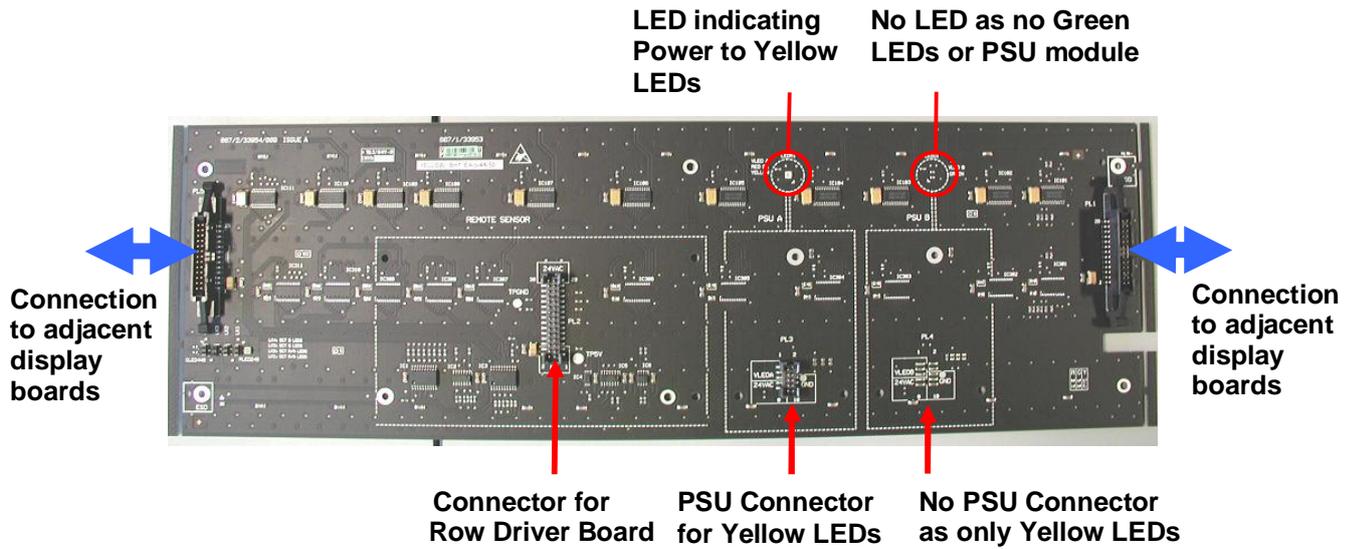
160mm Character PCB Assembly (Yellow Full Matrix) – Viewed from Rear
